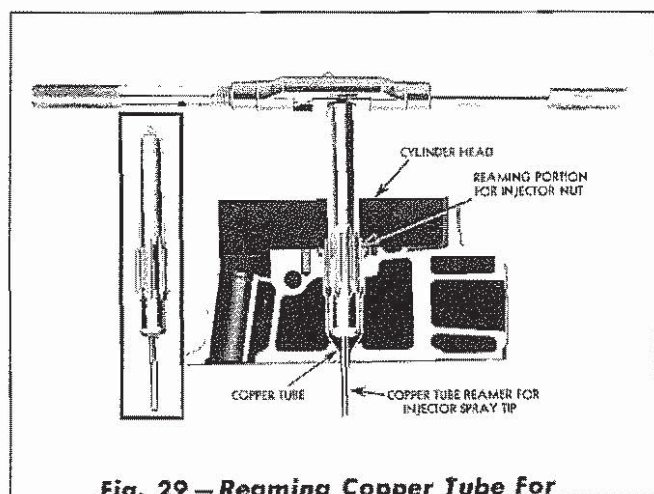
Reaming Copper Tube For Injector Body and Spray Tip
